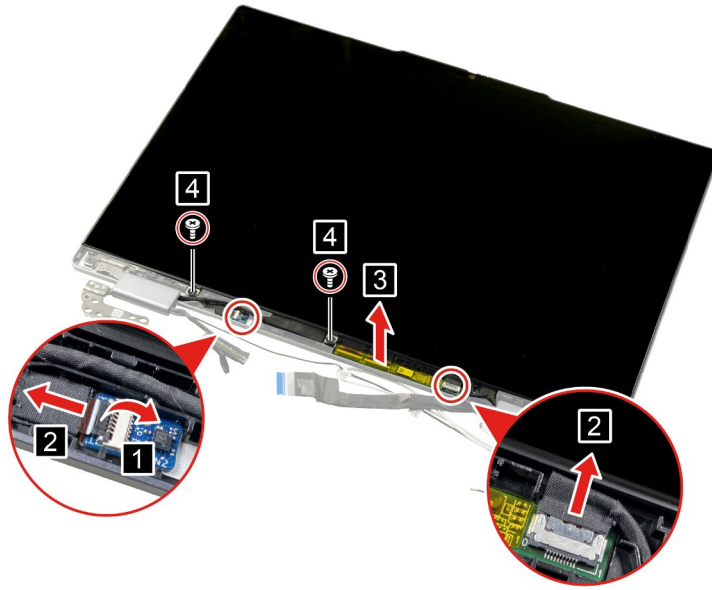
Disconnect the sensor board connector and the touch board connector, pry up the touch board, and remove two screws
